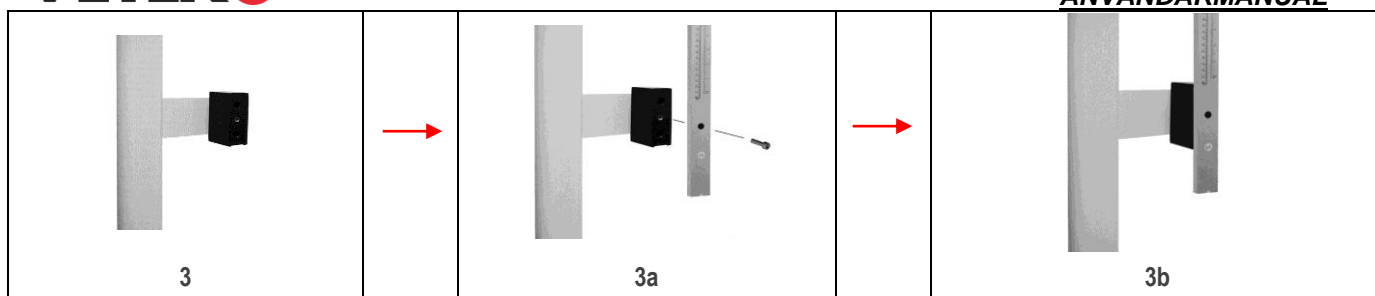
Assemble white metal support with abs black part white the screws (B+E). Lock all with the screws (D)
